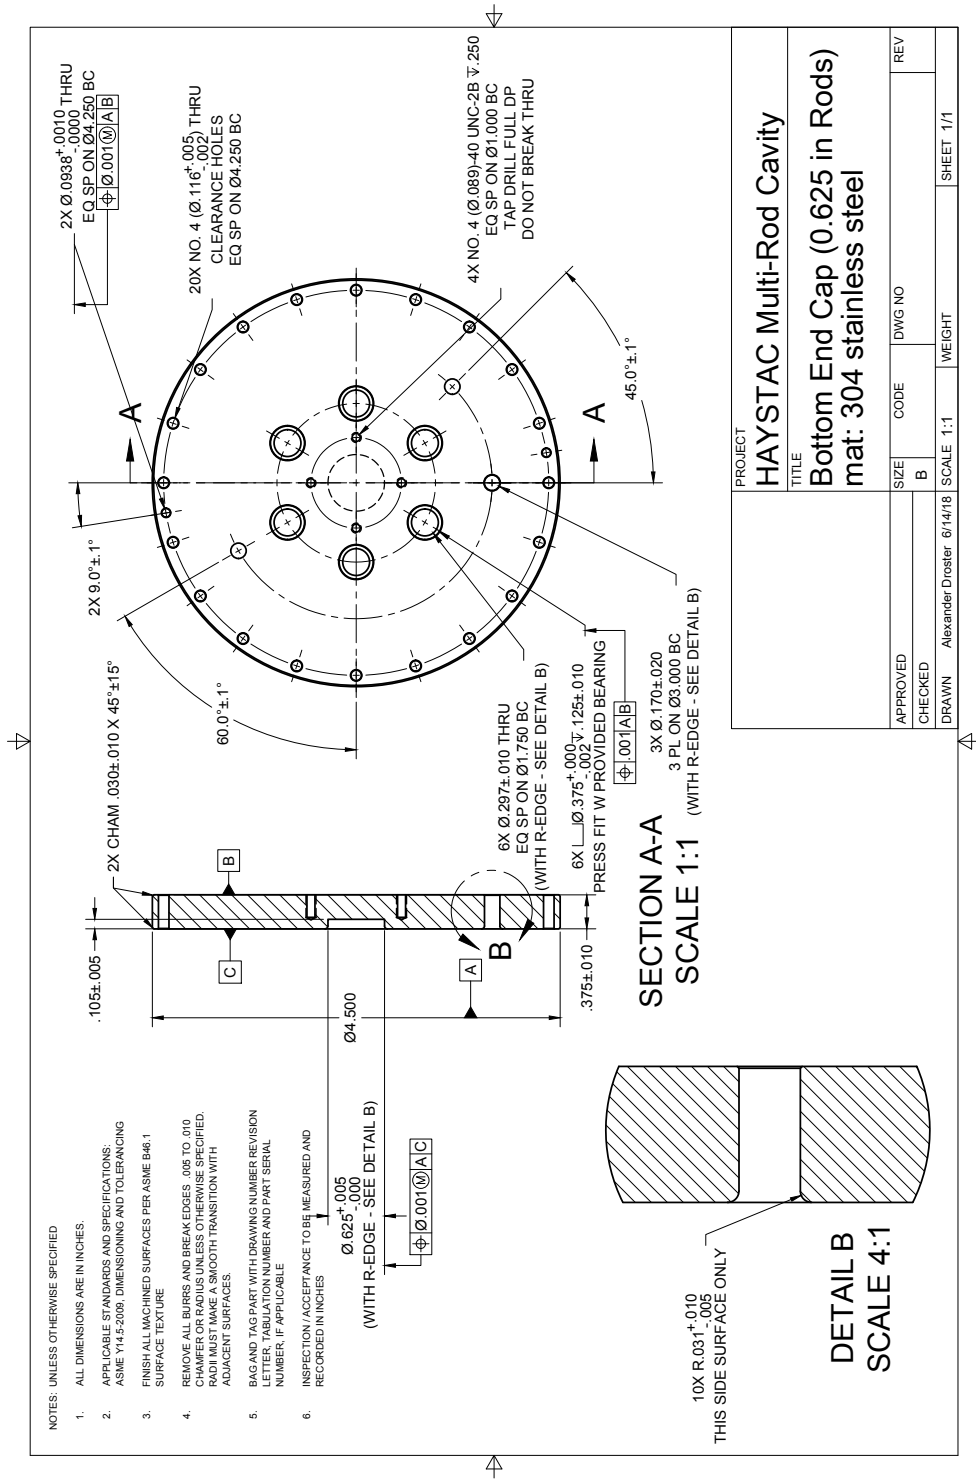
CAD drawing of the bottom endcap in the seven-rod cavity.
